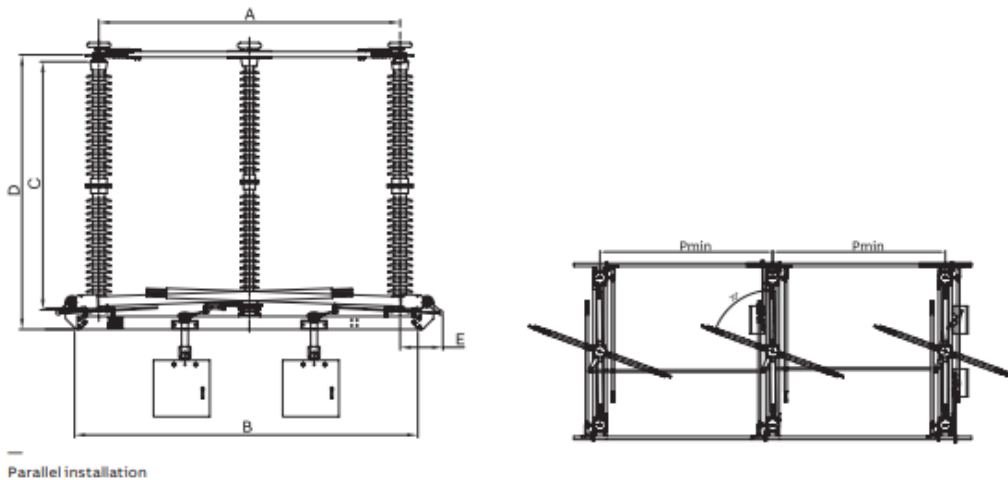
horizontal double break disconnector type eDB170 installation dimensions.
